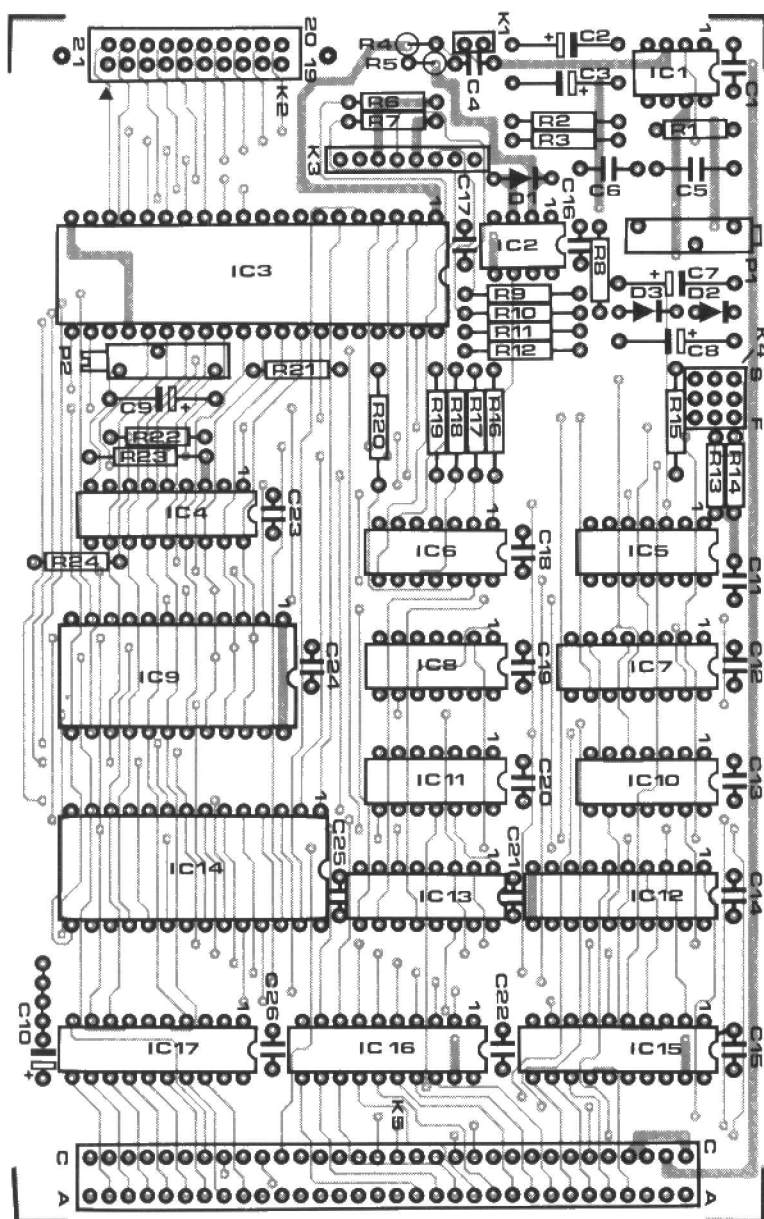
Component mounting plan of the double-sided, through-plated printed circuit board for the extension card.
